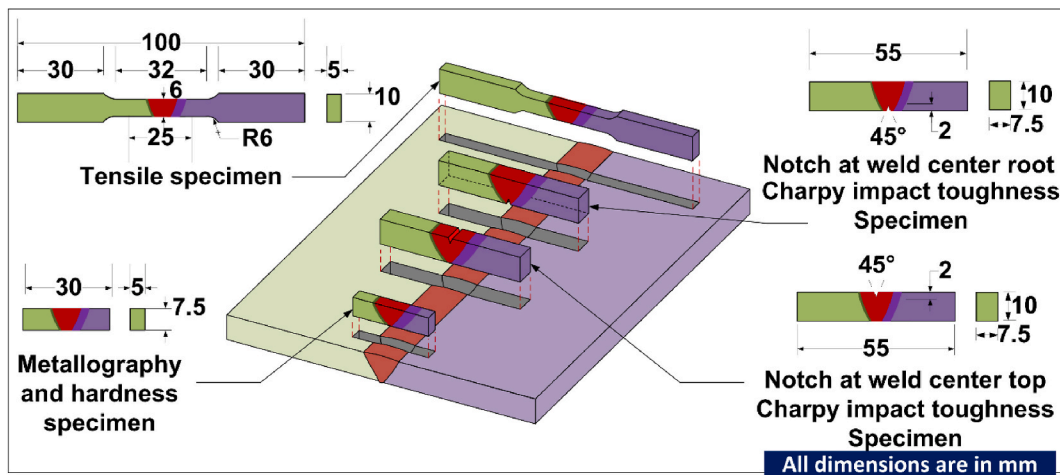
Extraction of the testing specimen from the welded plate with their dimensions.
